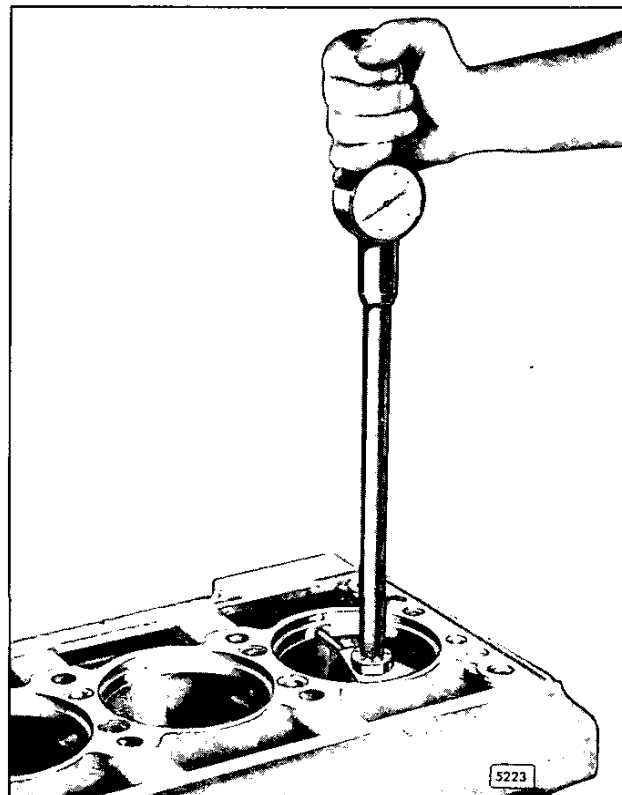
Checking Cylinder Block Bore with Tool J 5347-B
